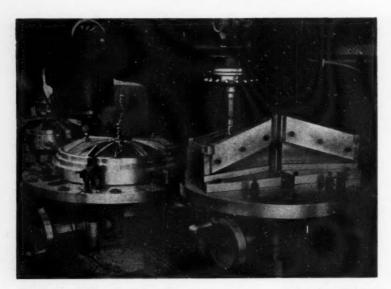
Close-up view of the set-up on a large Hydro-Tel milling machine for producing 12 propellent cavities in the convex side of each of two injector plates, simultaneously. The arrangement of the two templates required is clearly shown
